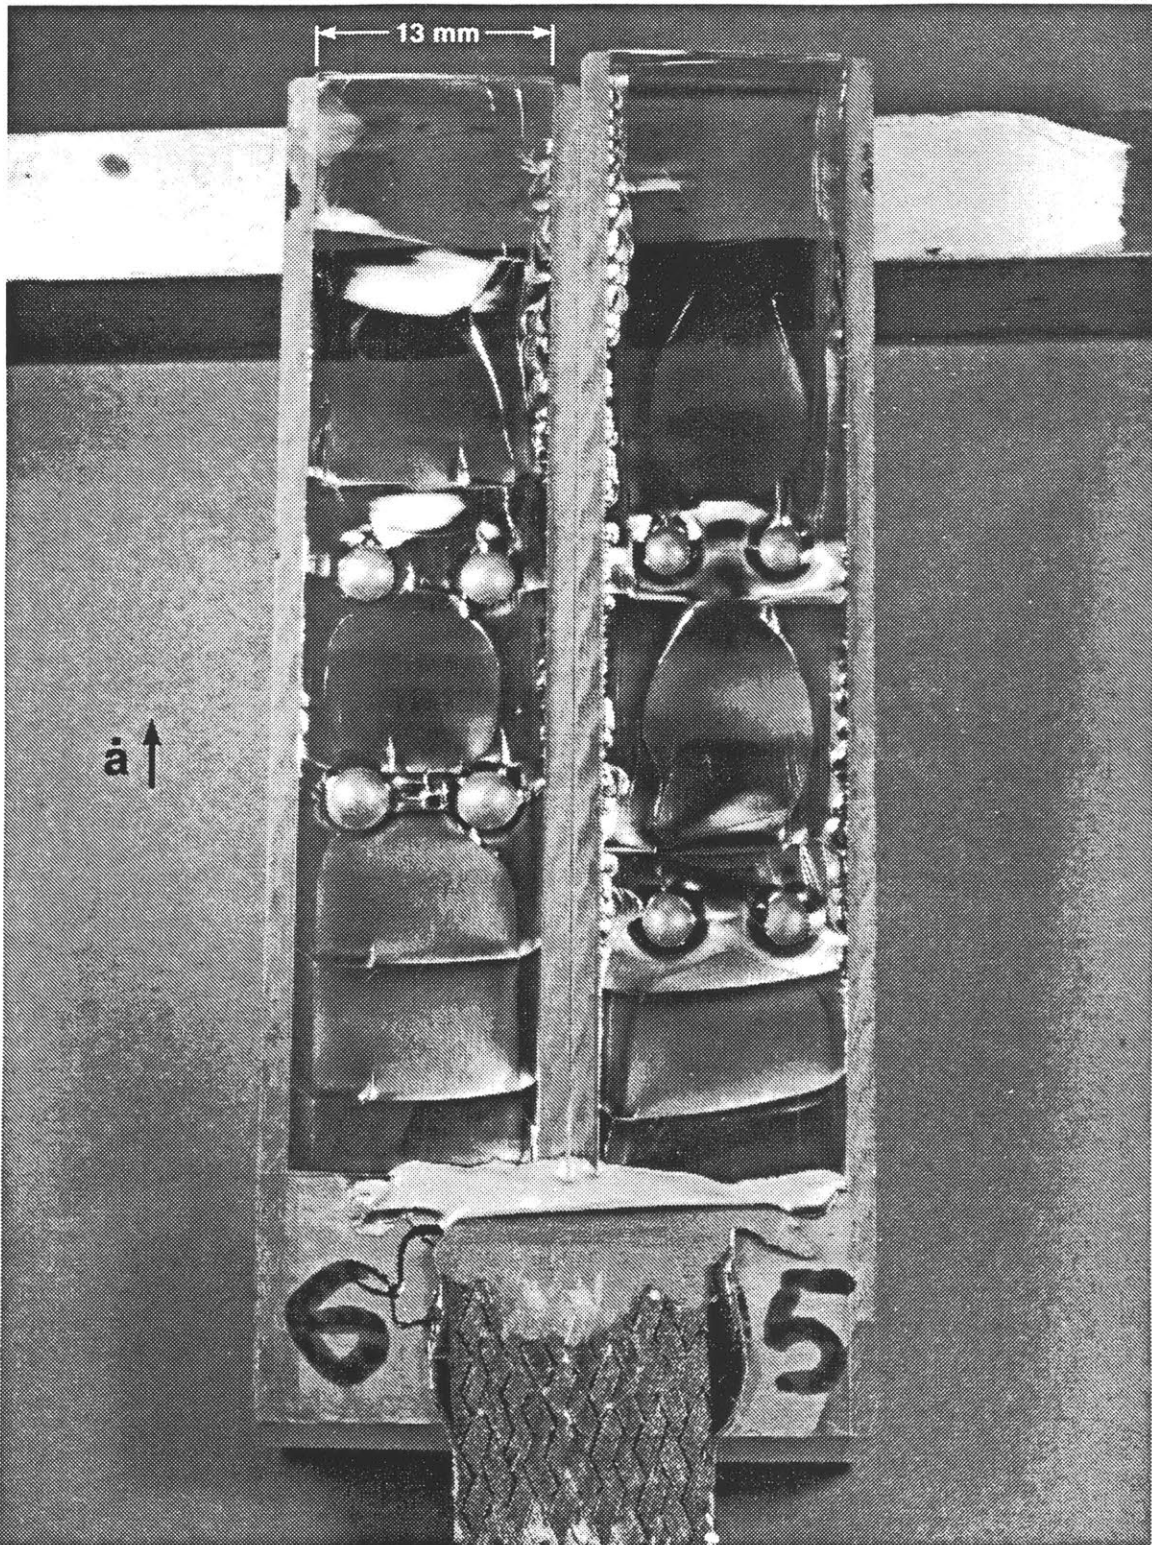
Fracture surfaces (gold-coated) from two typical 13-mm DCB specimens containing 3.17-mm diameter Nylon spheres.
